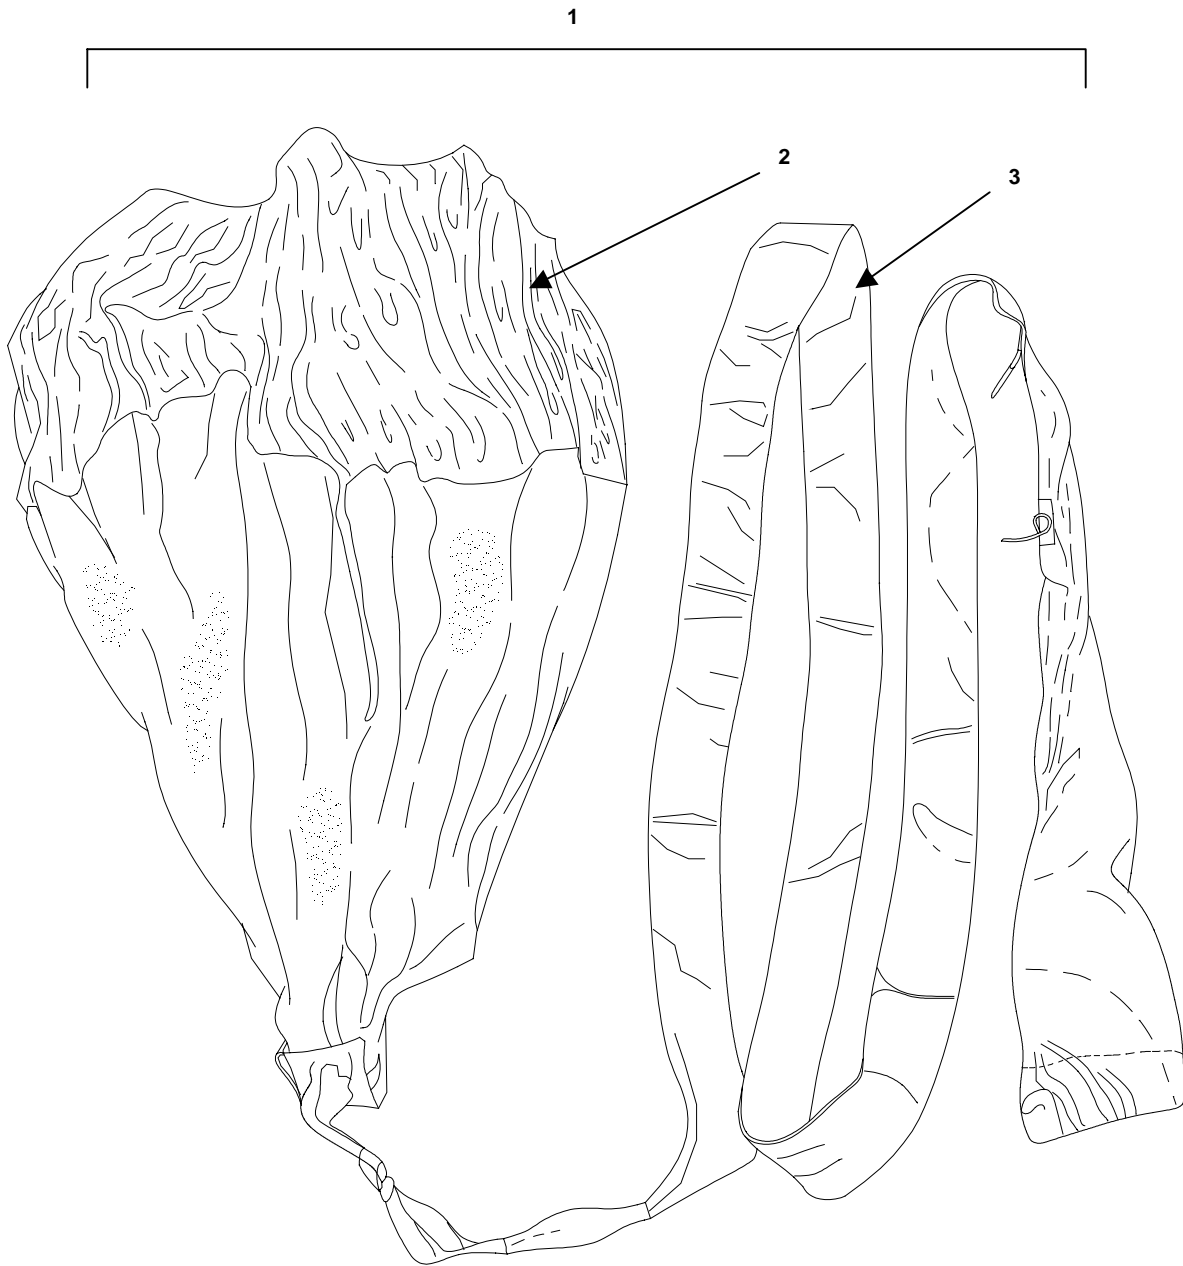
Group 01 Pilot Chute and Bridle Line Assembly.
